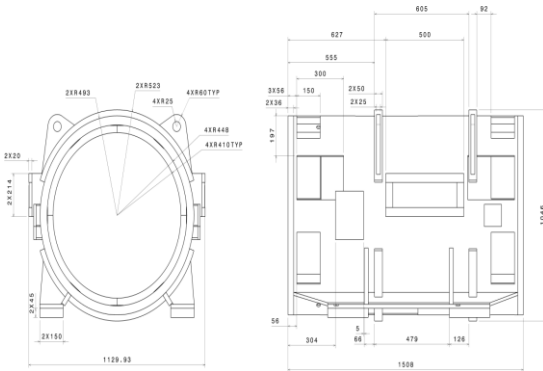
Dimensional specification of fabricated weld structure
